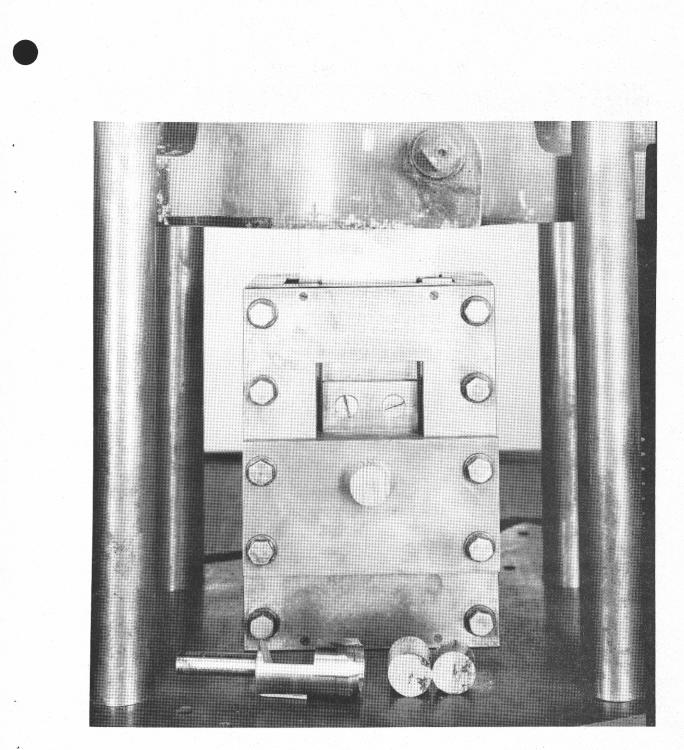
Shear tool with cylindrical specimen inserted for testing. A broken specimen and a plug cutter are shown at the base of the tool.
